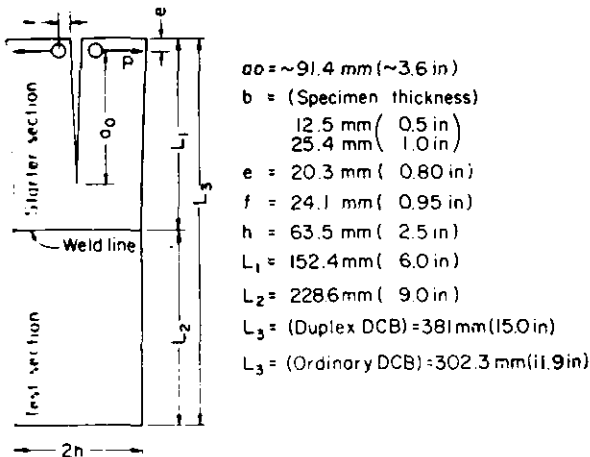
Dimensions of Duplex Wedge-Loaded, Double-Cantilevered-Beam Test Specimen.
